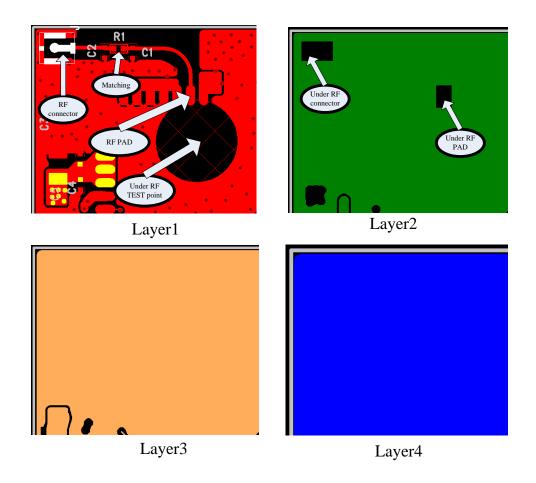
Reference PCB design with RF connector in a four-layer PCB
